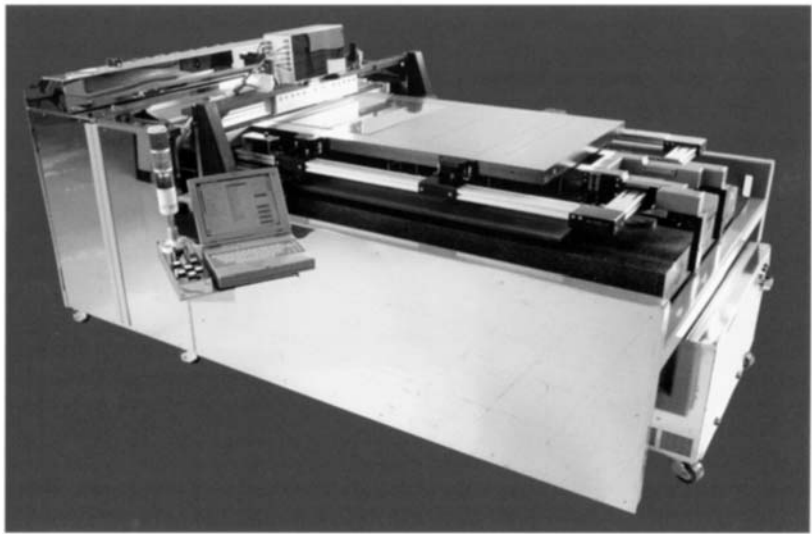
Moving-head extrusion coating system. (Courtesy FAS Technologies.)
